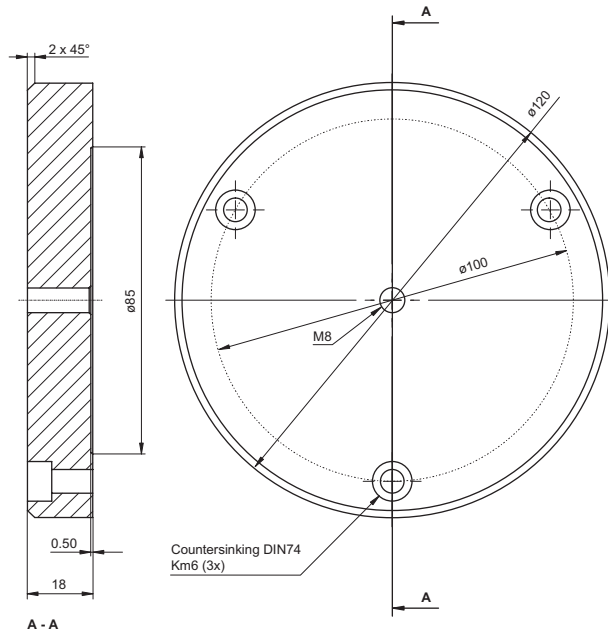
Base plate for the flexible arm OFV-039 (dimensions not specified are given in mm)
